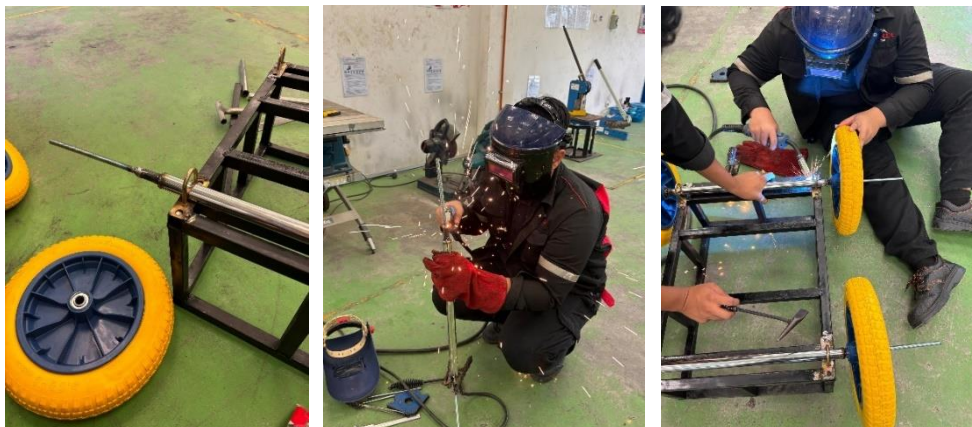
The progress to produce Wheel support. Welding wheel supports the upper body of the trolley for ensuring stability and balance.
